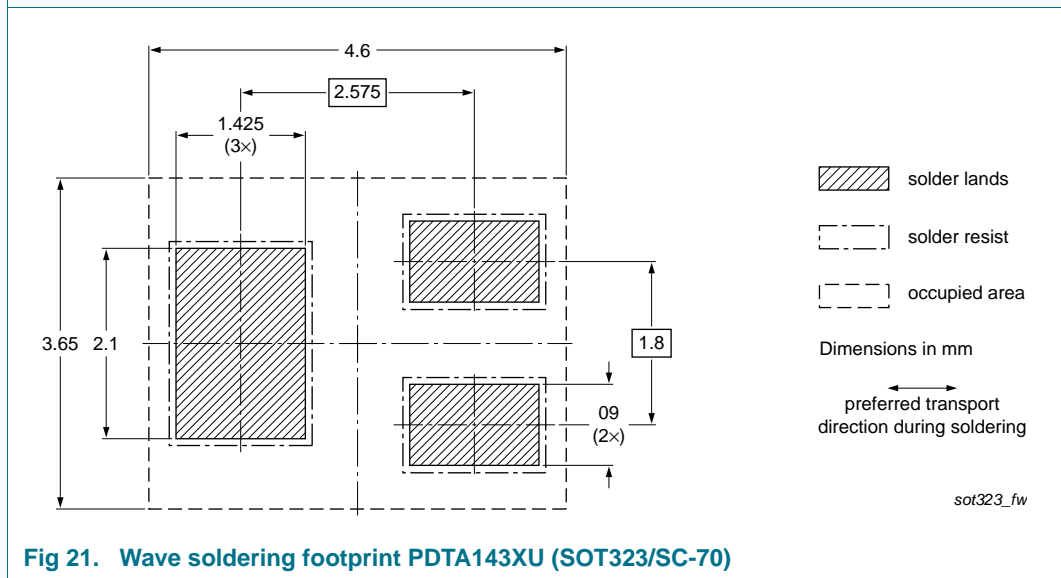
Wave soldering footprint PDTA143XU (SOT323/SC-70)
